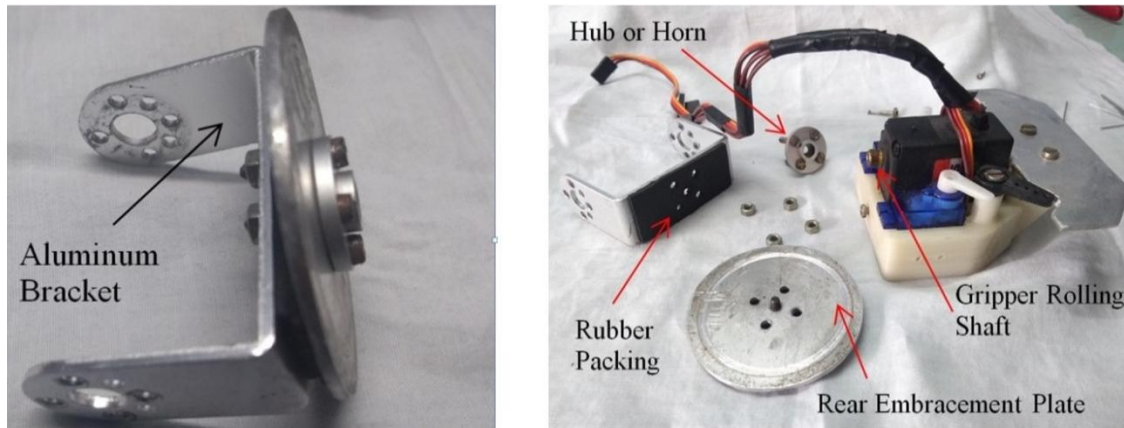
Rear Embrace Plate (Assembled and Disassembled)
